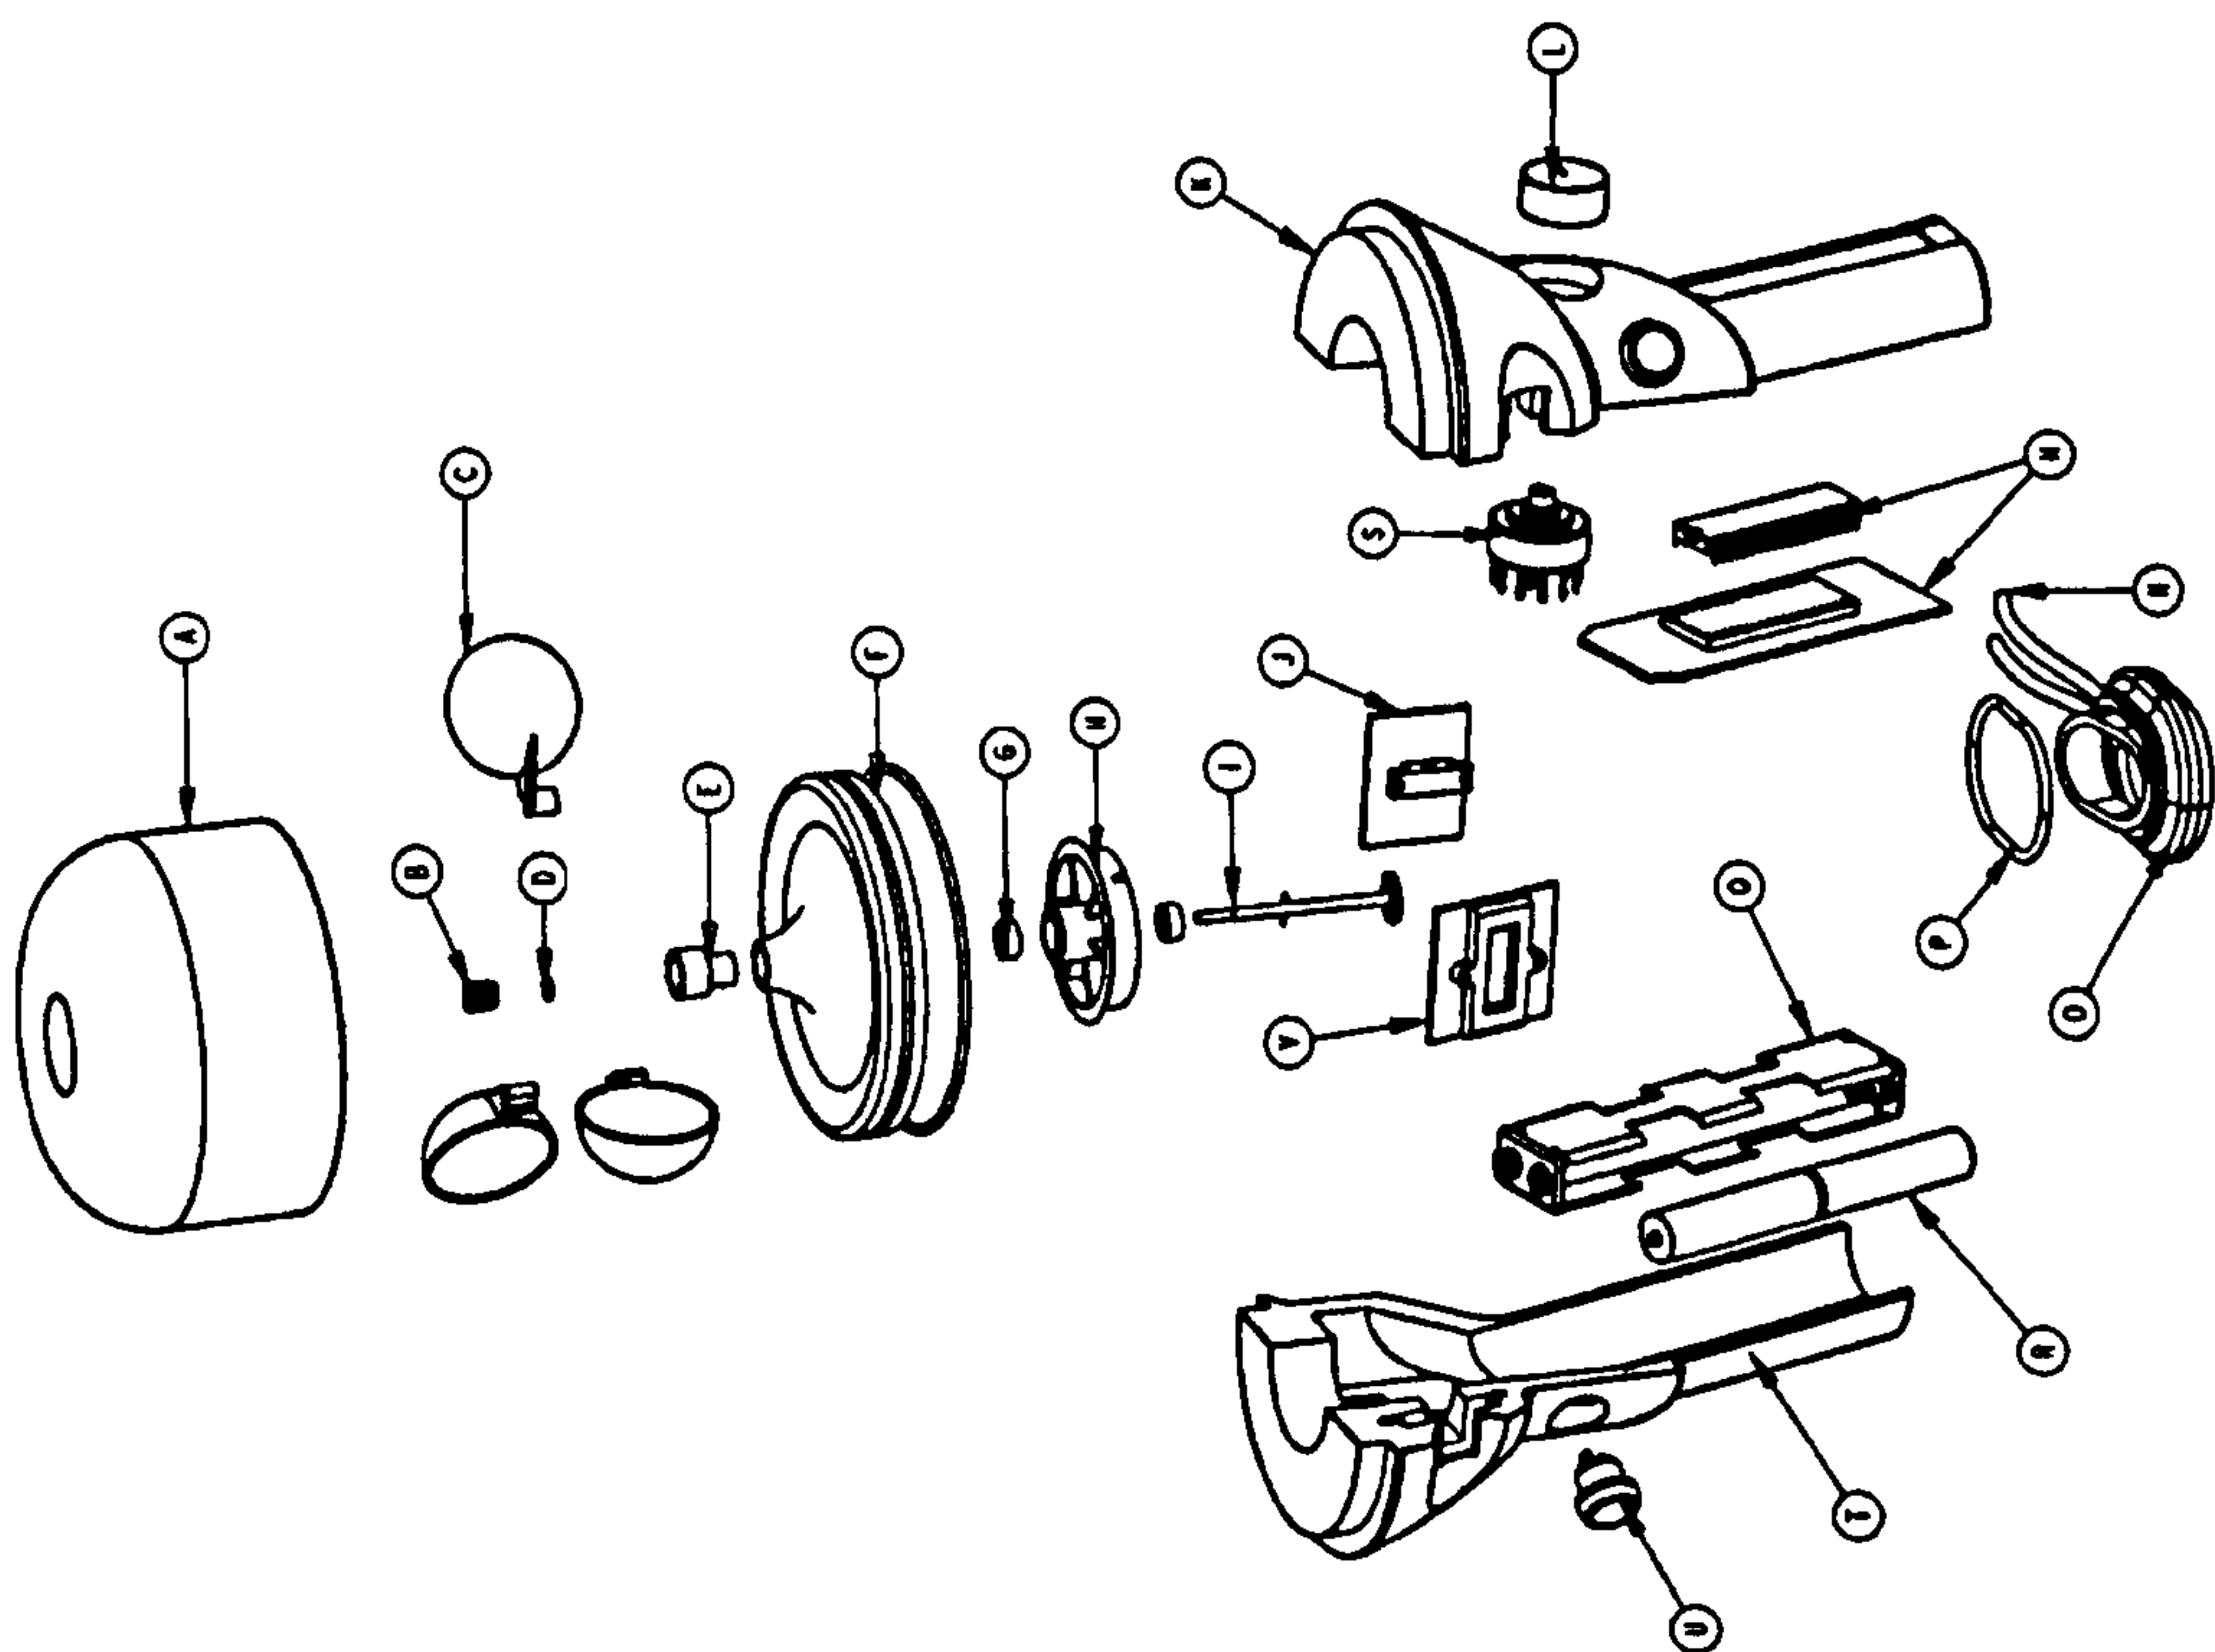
Hand held Wind Anemometer, Exploded View.
